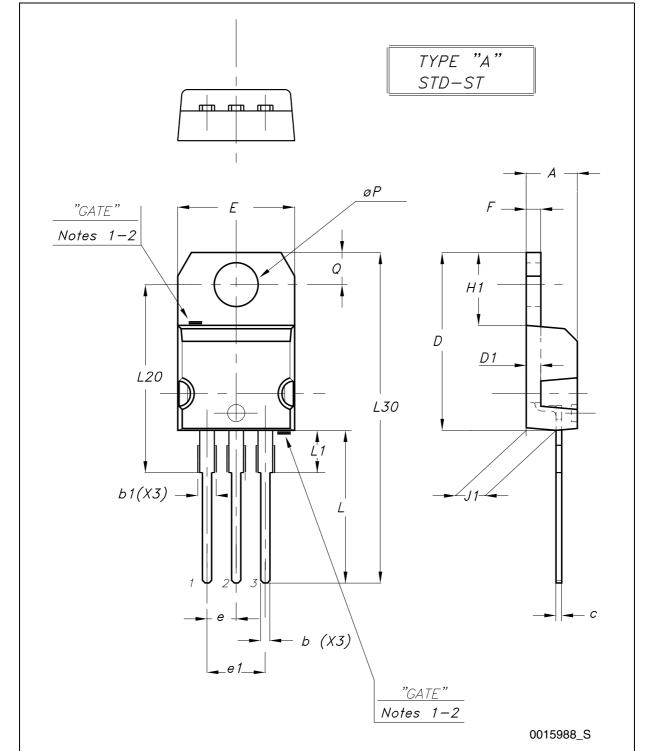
Drawing dimension TO-220 (type STD-ST Dual Gauge)
